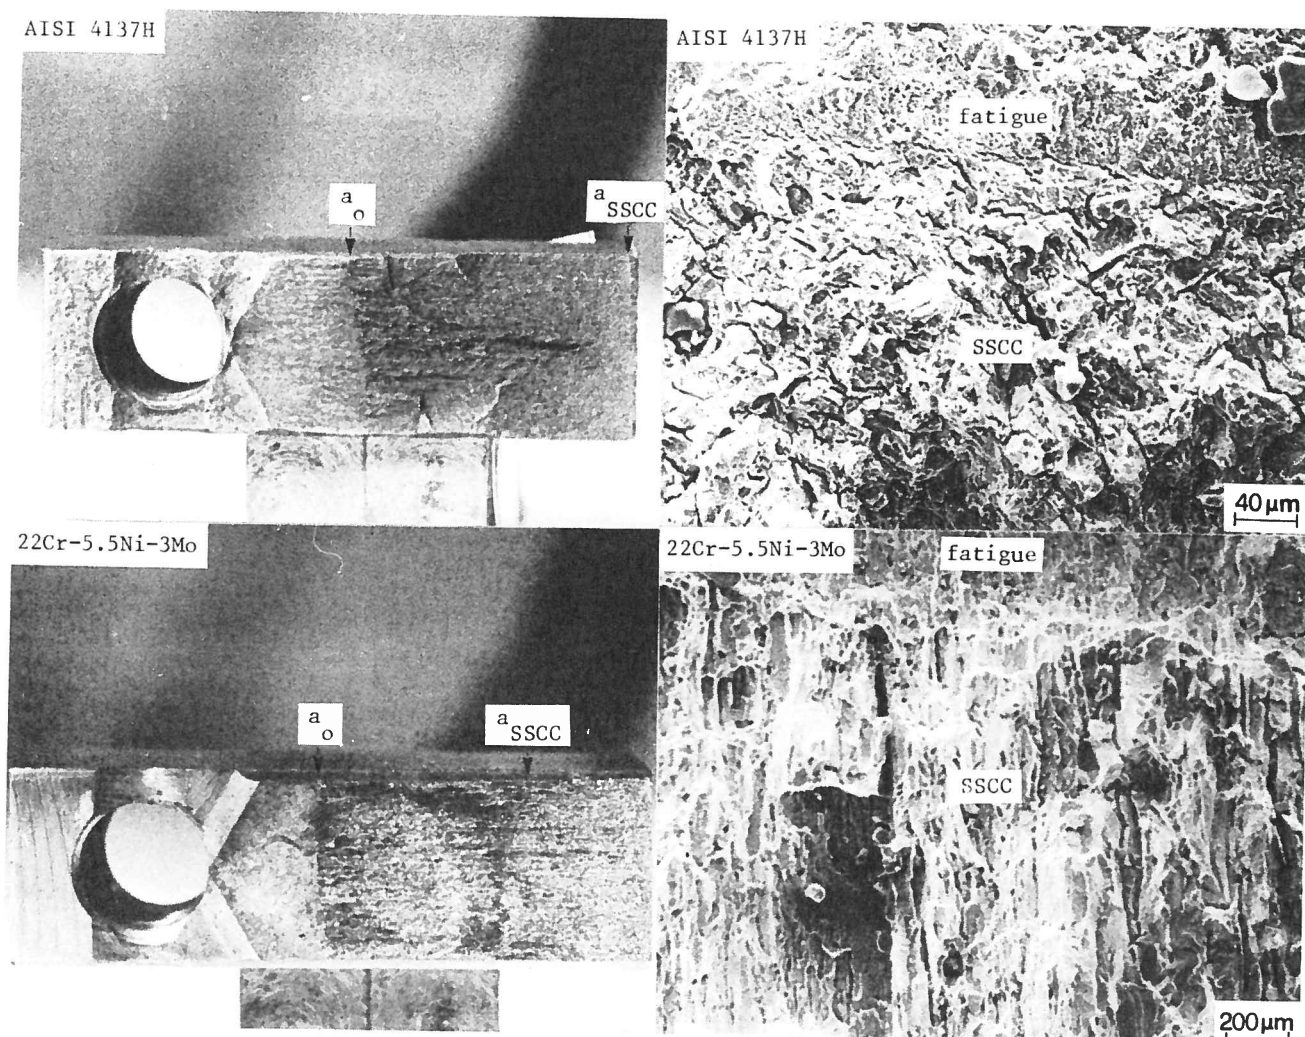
Macro and micro fractographies of 1/2" thick WOL-modified specimens.
